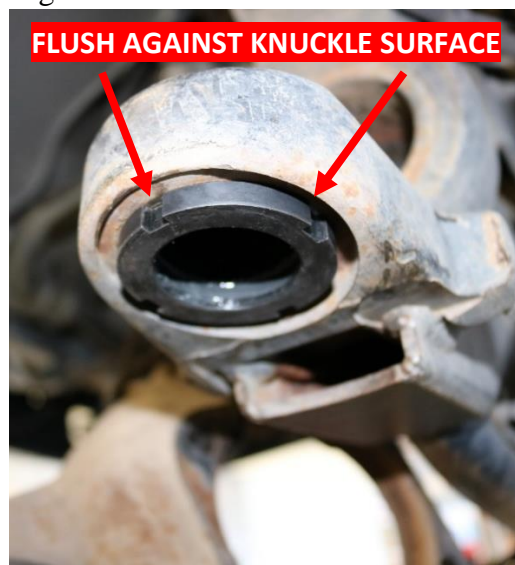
Lower Ball Joint Body Pressed In. Joint Shown Disassembled for Clarity, Recommend Pressing in Assembled.
